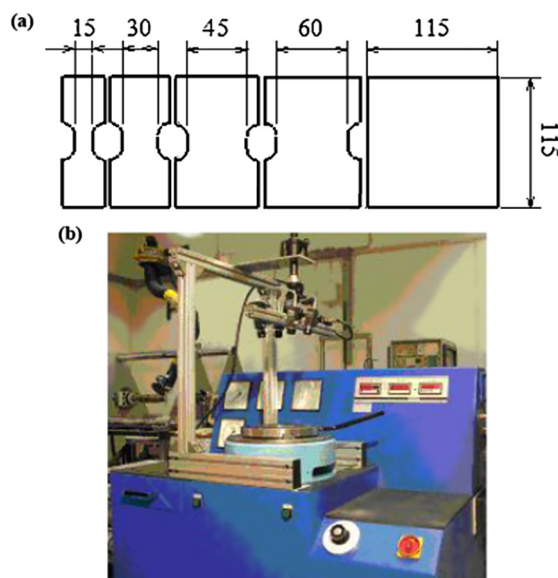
Nakazima stretch-forming test; (a) geometries of the specimens (all dimensions in mm), and (b) the test set-up.
